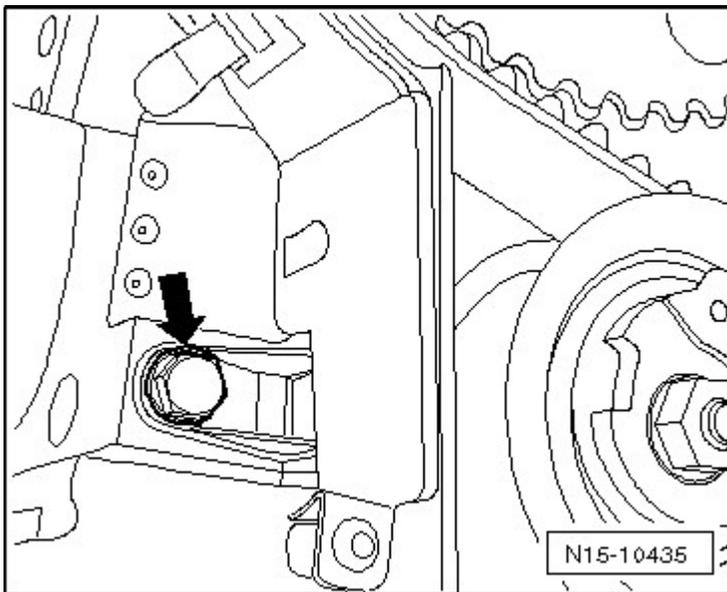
Identifying Rear Toothed Belt Guard Bolt
